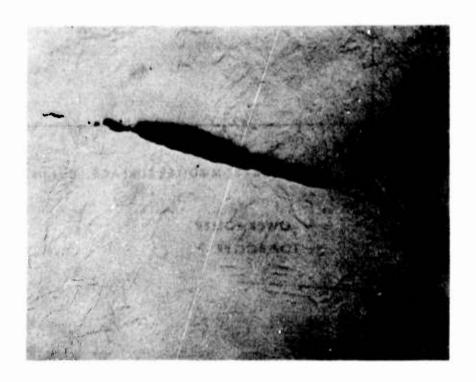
Cracks Extending From Electron Beam Weld Voids.
